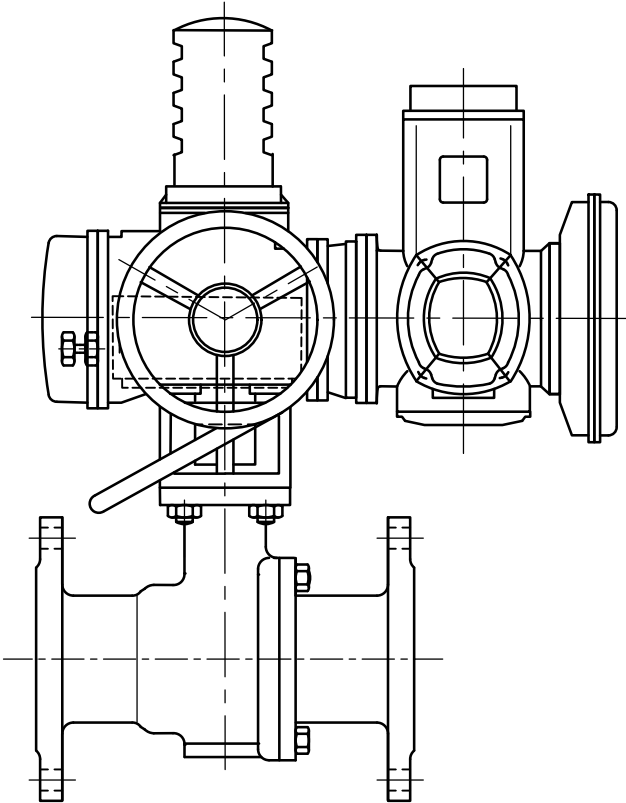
ELECTRICAL ACTUATOR OPERATED VALVE
